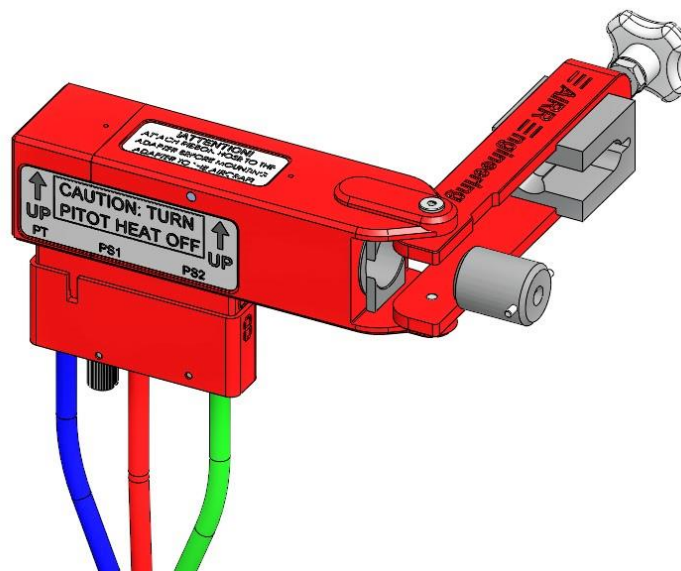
adapter cam handle in the open position pointing away from the fuselage, pusher retracted
